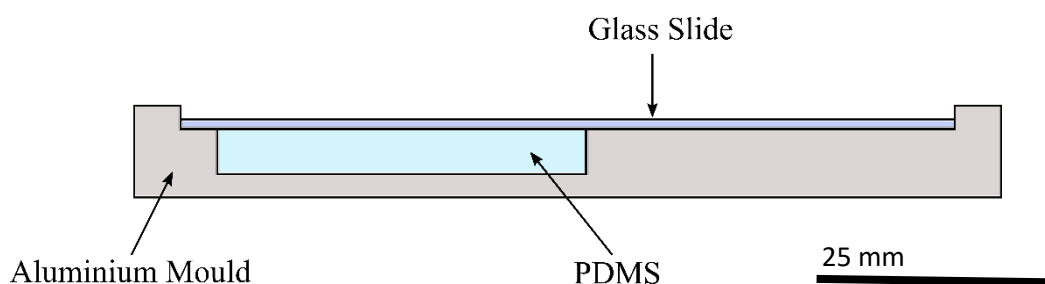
Schematic diagram showing the PDMS casting with using the aluminium mould and a glass slide backing.
